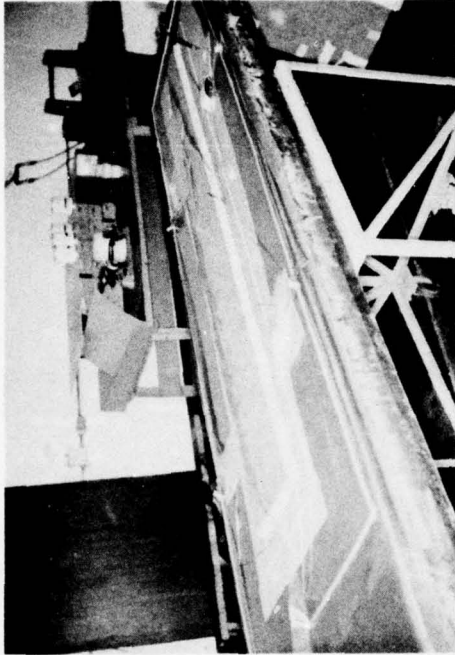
VACUUM DEBULKING OF SPOILER ASSEMBLY
